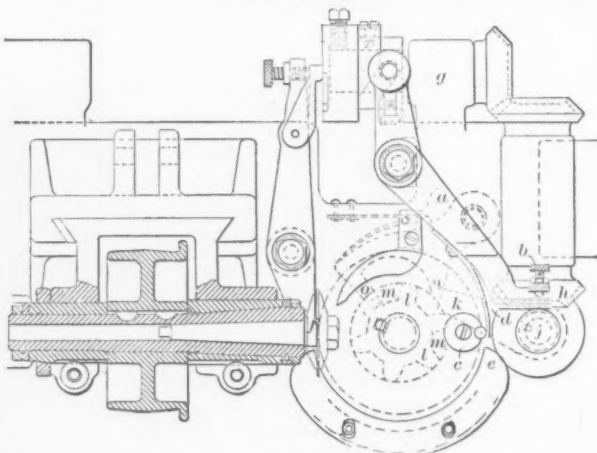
Detail Plan of the Turret and the Feeding Mechanism.
